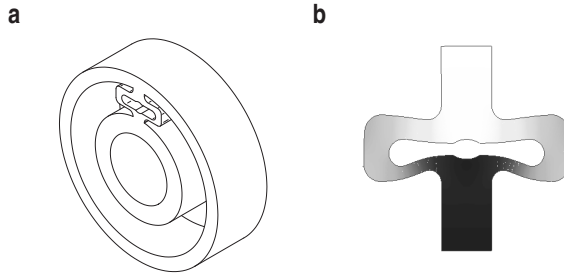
Design (a) and deformation (b) of the dummy bearing, used to validate the identification of the bearing stiffness.
